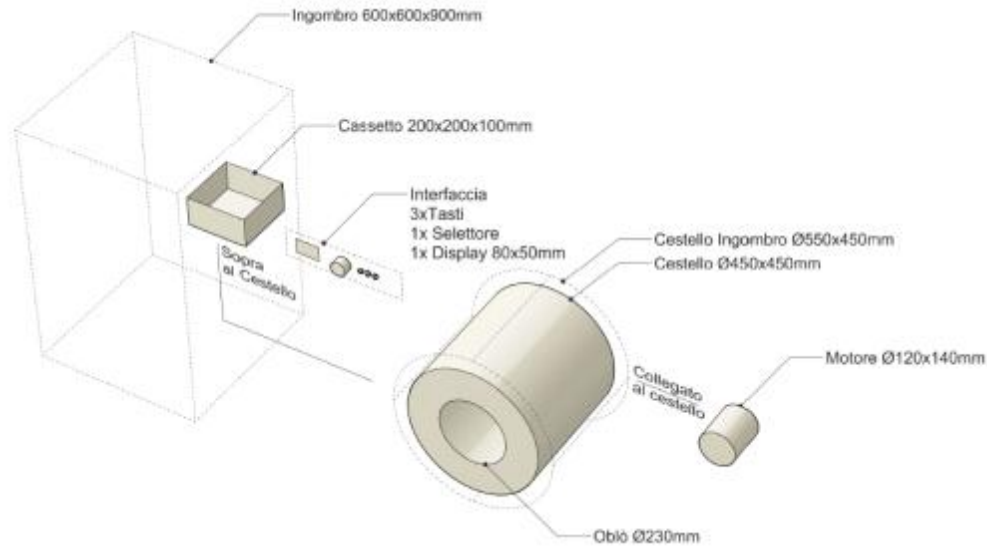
The technical components and the outer dimensions of a washing machine which the designers were asked to respect
